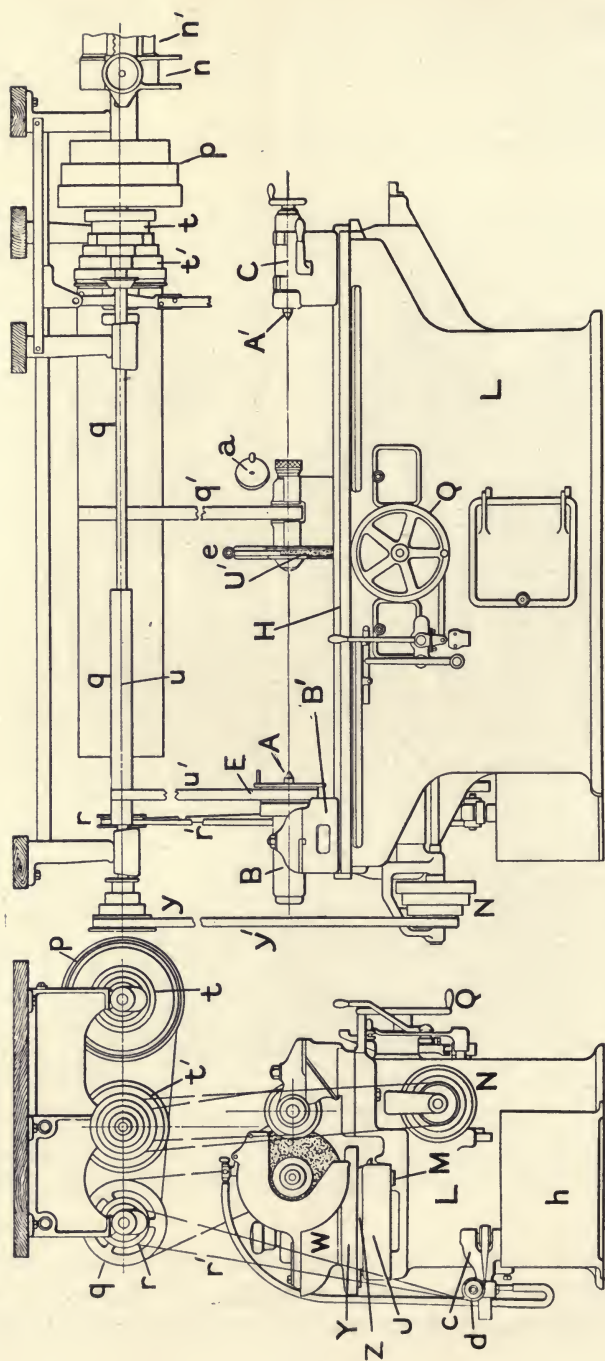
LANDIS UNIVERSAL GRINDER. ARRANGEMENT OF THE DRIVE
